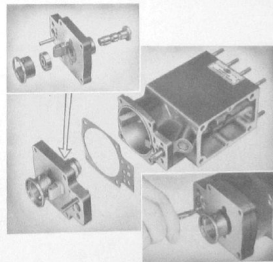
Assembling and Installing Controllet Assembly—Composite View
